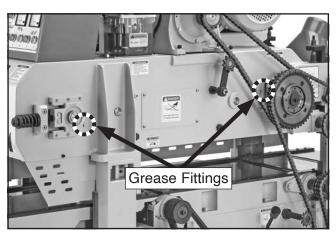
Location of feed belt roller bearing grease fittings—right side.
